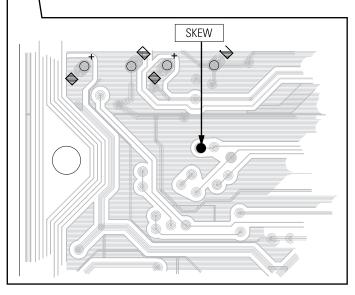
Location of test Point (DVD Main PCB - Bottom Side)
